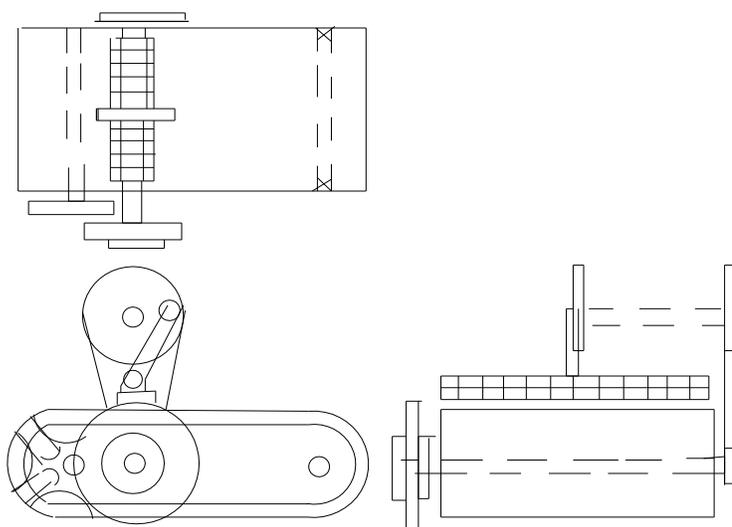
Orthographic View of the Plantain Slicing Machine
